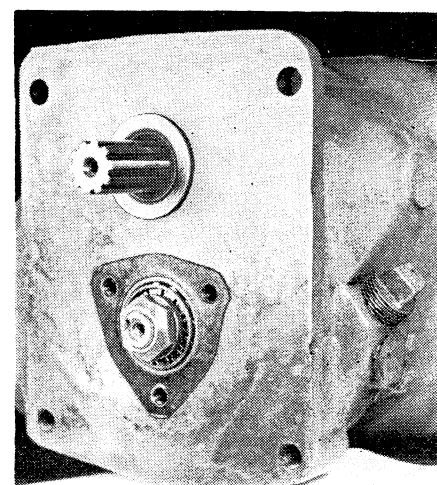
Pony transmission front seals. Input (upper) shaft seal is installed with lip facing inward. The sliding gear (lower) shaft is integral with main bevel pinion and is sealed by a cap and gasket.
